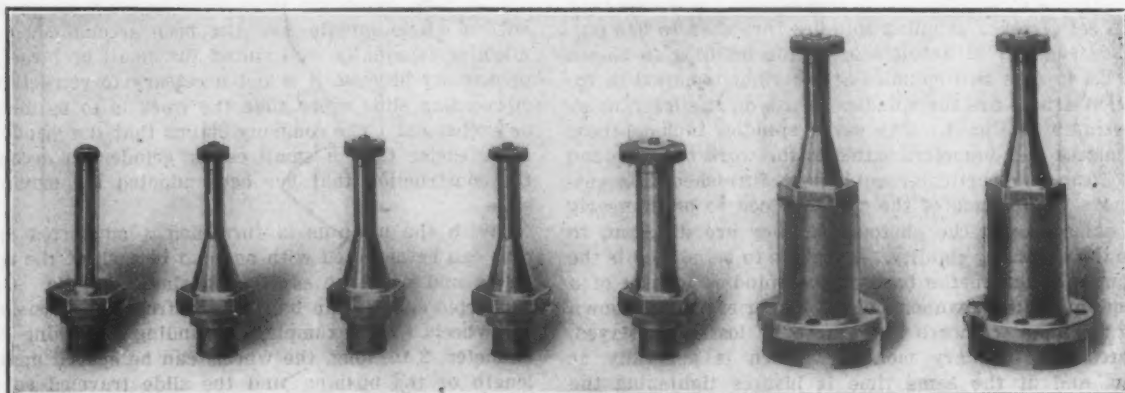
A Typical Equipment of Interchangeable Grinding Spindles.
